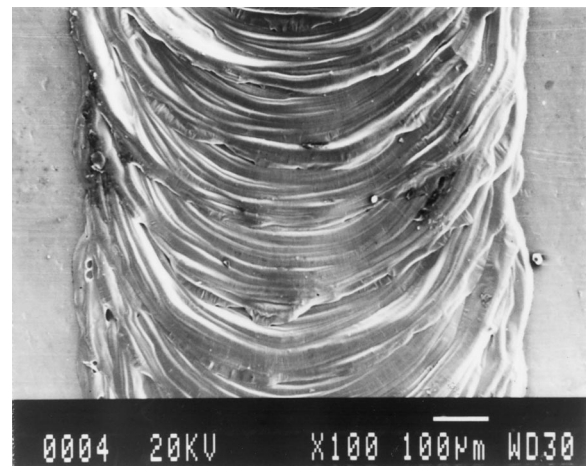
Weld bead surface of a weld made with a ramped-down temporal pulse shape.
